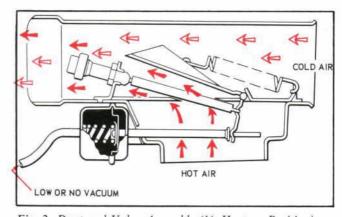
Duct and Valve Assembly (1/2 Heat on Position)
